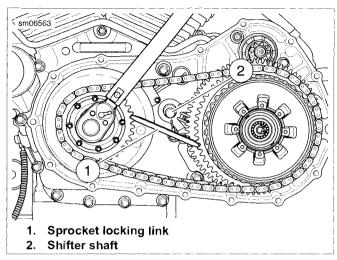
Tighten Engine Sprocket Fastener (typical)
